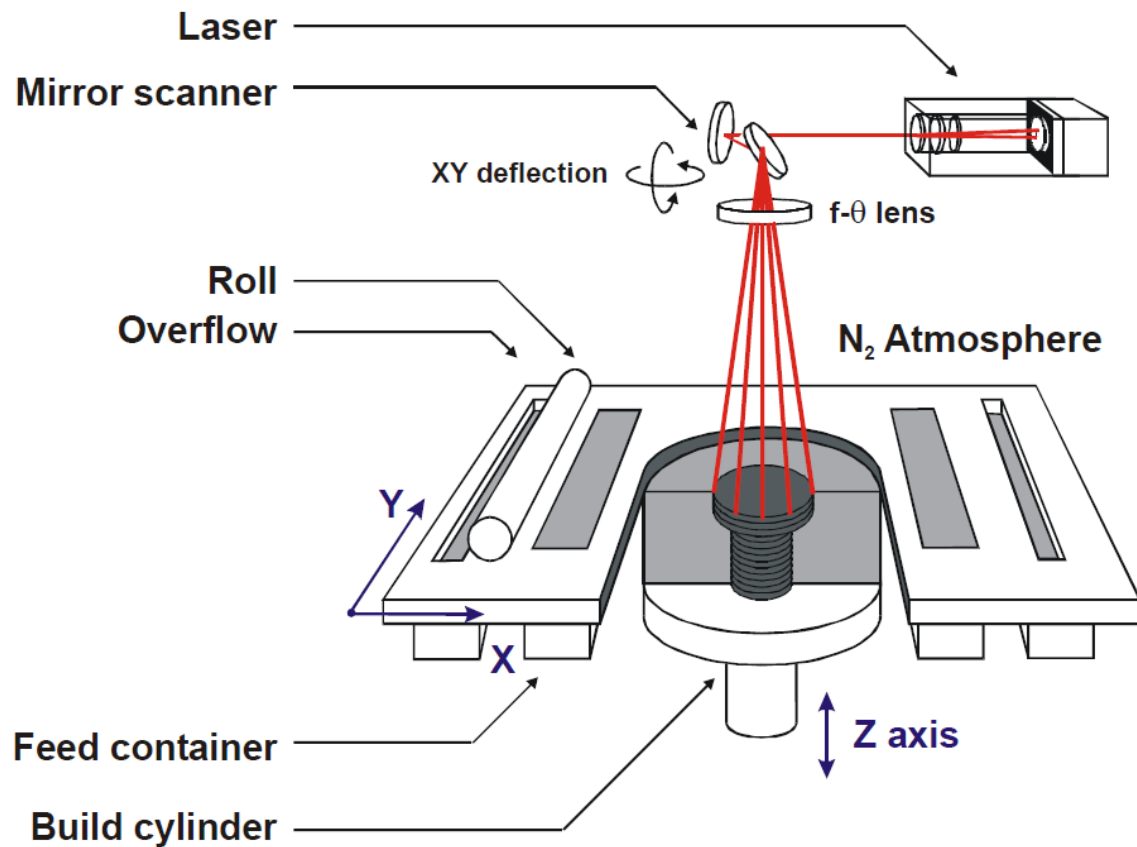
Main parts and machine layout of a typical SLS machine; taken from Kruth et al. [20].
